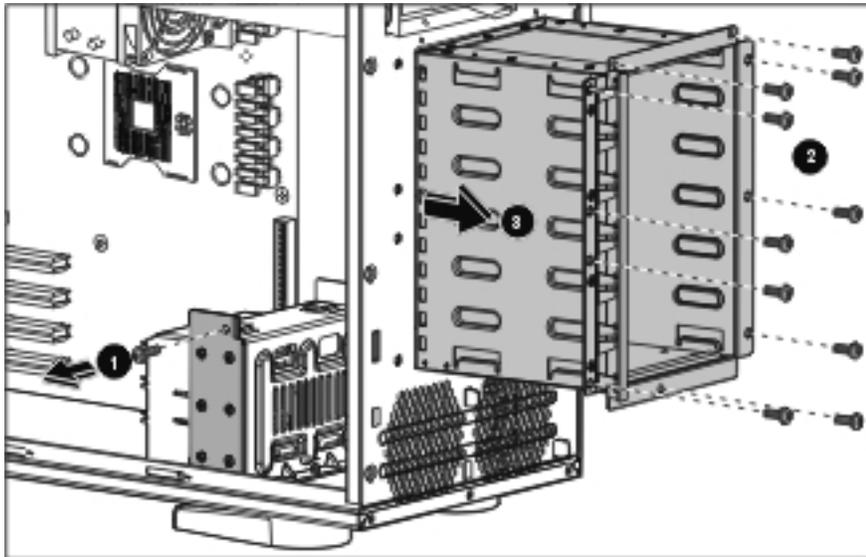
Removing the SCSI hot-plug hard drive cage
